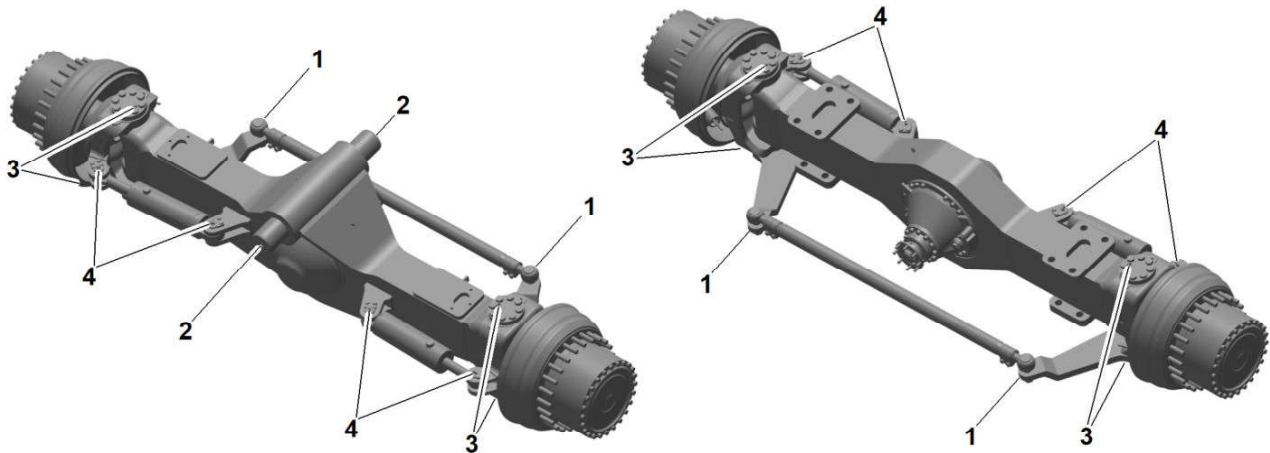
Lubricating points of oscillating axle and steered rigid axle
